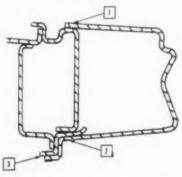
Locations to weld when replacing body side sill panel: 1. top, 2. bottom side and 3. bottom flange.
